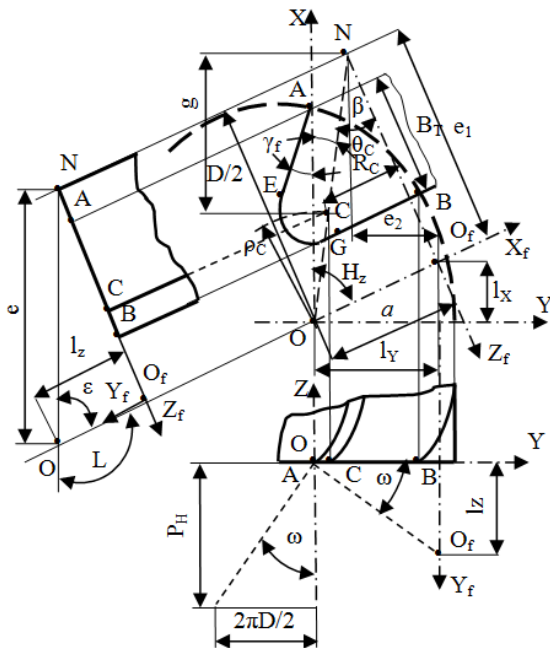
The calculus scheme for the installation parameters of disk-milling tool
